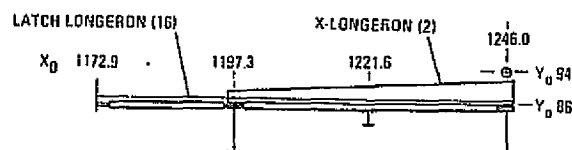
Adapter Sidewall Cross Section Schematic
